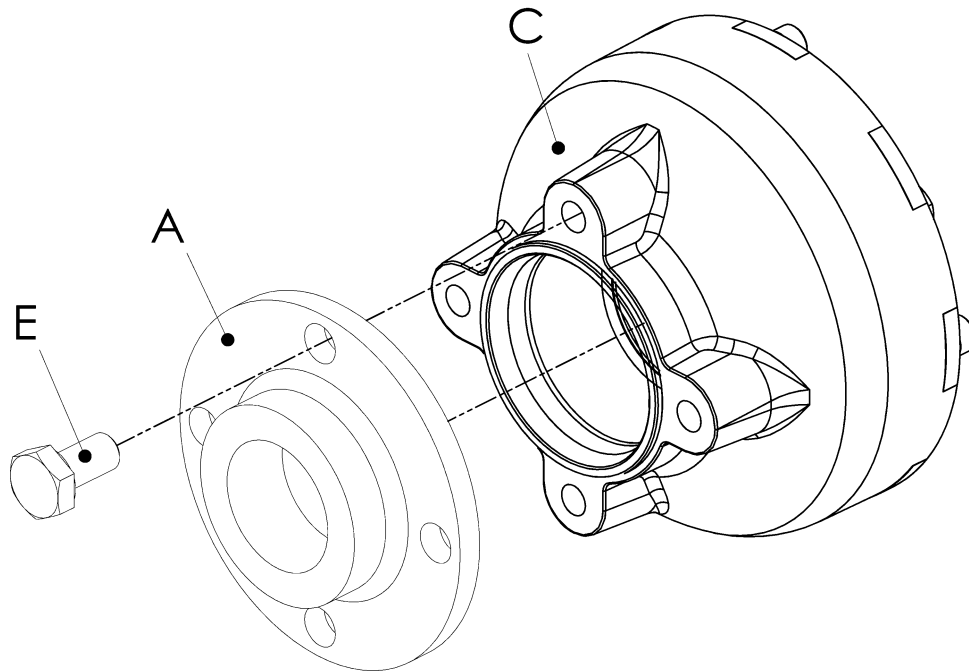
Screwing the coupling to the transmission flange using screws
